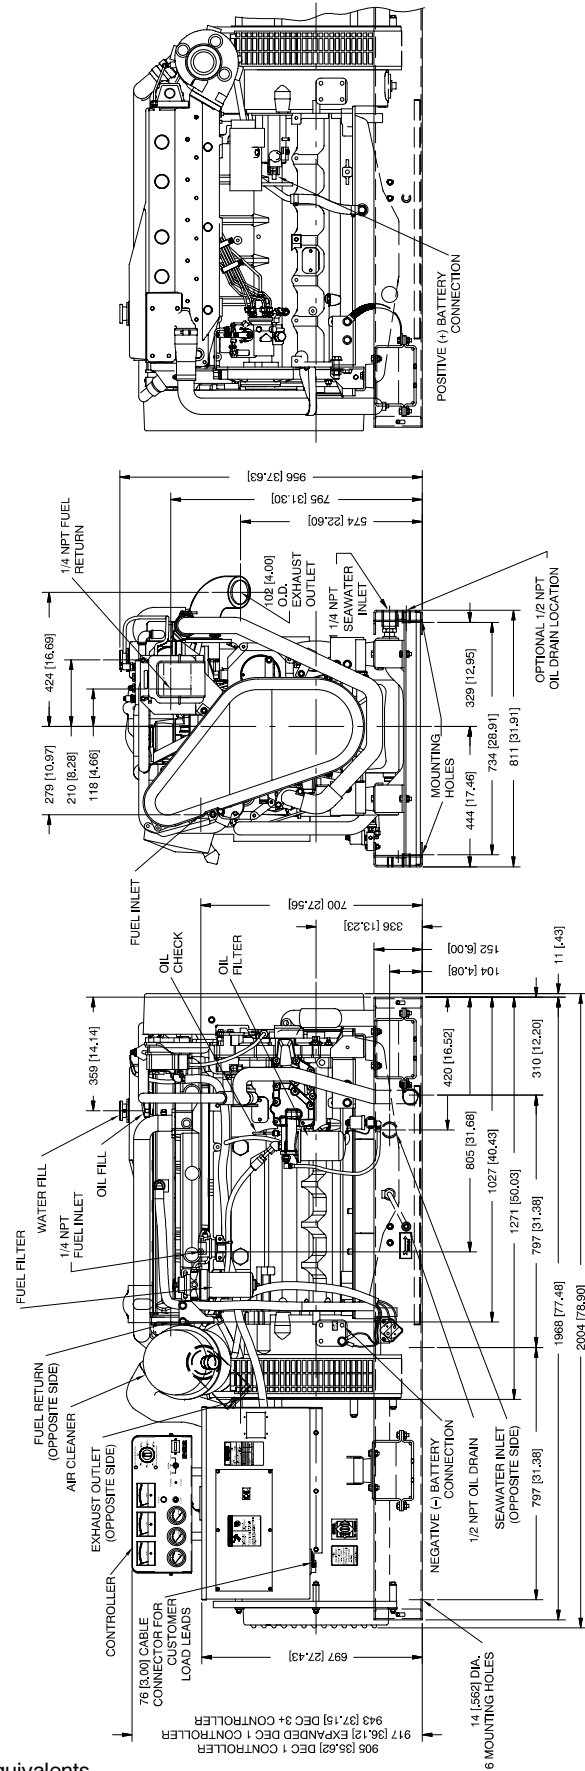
Dimension Drawing, 55EFOZ/65EOZ with Sound Shield
